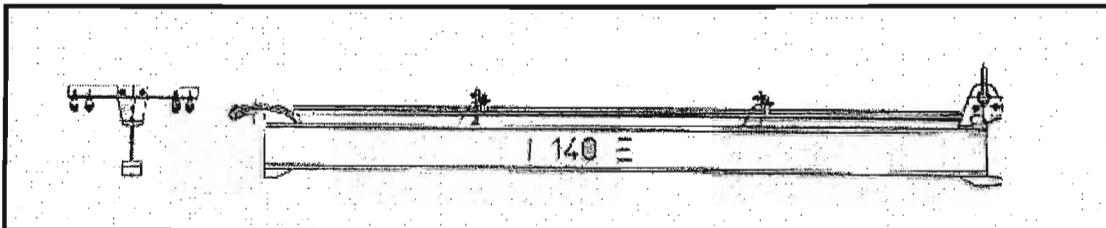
I-beam rail with conductor rails (Nehrling, 2002)
